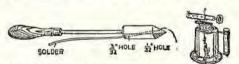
Illustration at left shows a simple and handy method for soldering. The wire solder is inserted in a hole drilled in the soldering copper. A blowpipe torch is shown on the right.
